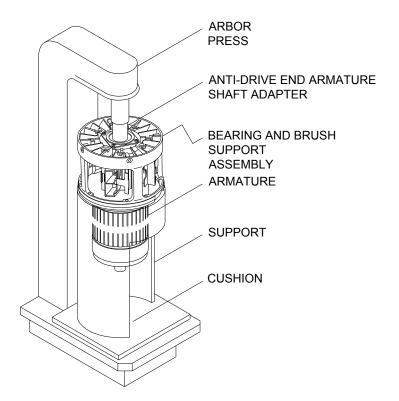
Remove the Armature from the Bearing and Brush Support Assembly
